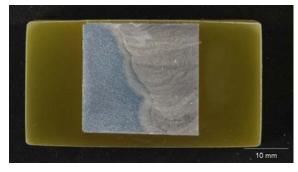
Micrograph of service exposed P22 fillet weld – middle section
